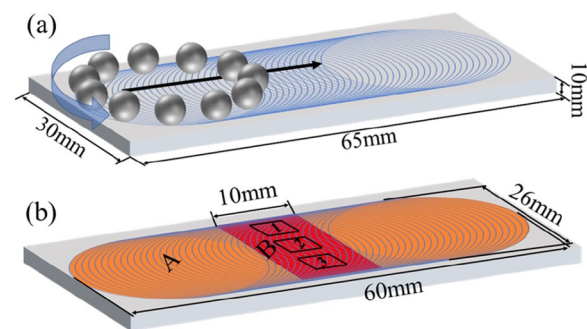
Burnishing process: (a) Burnishing path, (b) Burnishing area
